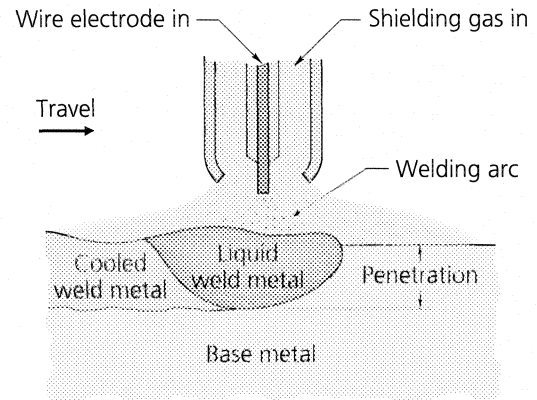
Gas-Metal Arc Welding
